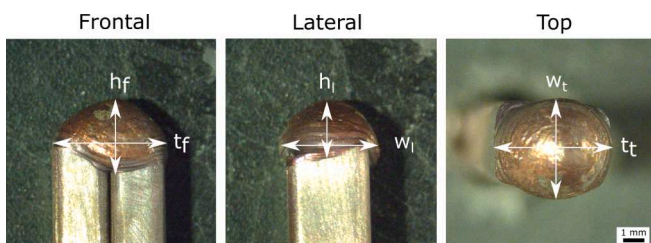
Schematic description of the weld seam geometry measurements.
